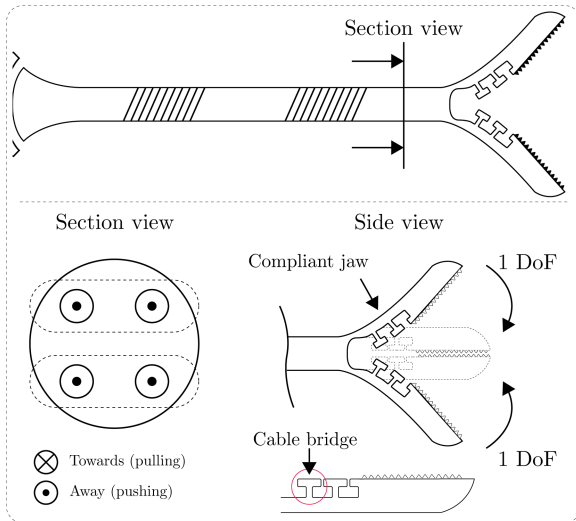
Cable analysis inside the grasping segment, resulting in closing by cable tension and opening by the compliant spring when no cable tension is present.
